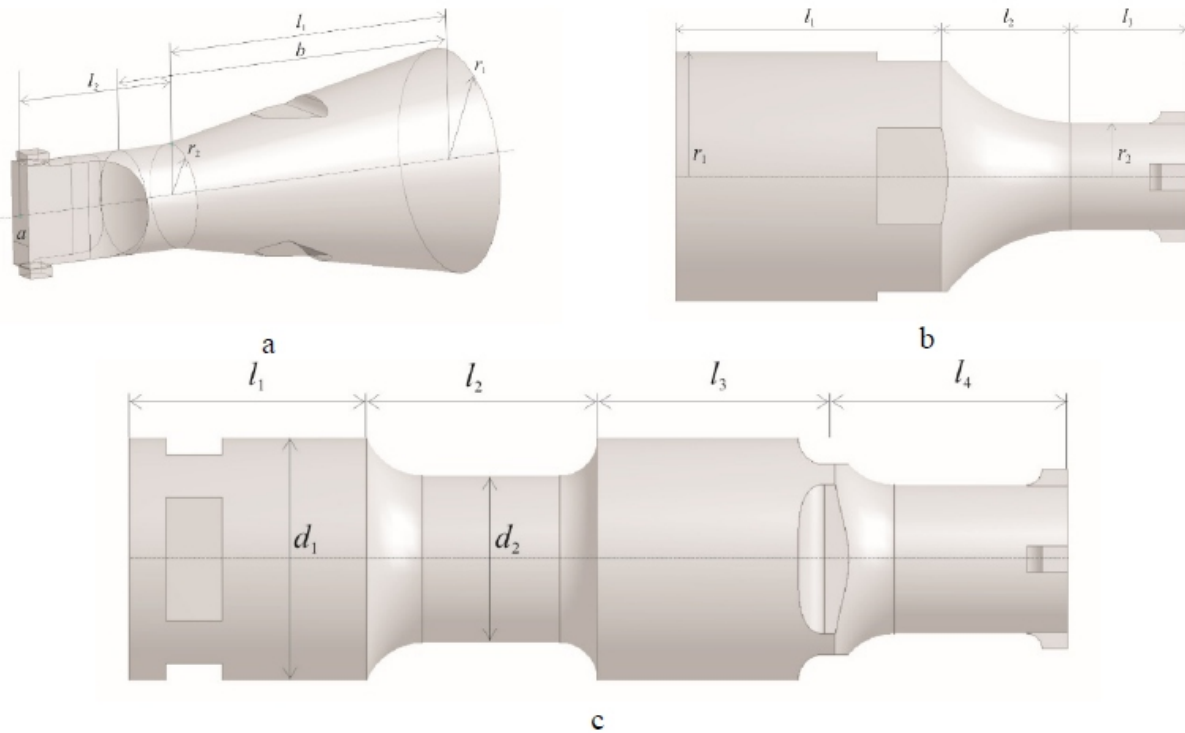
Schemes for design of horns for ultrasonic spot welding: (a) half-wave composite horn consisting of conical input and cylindrical output cut by radial surfaces (type 1); (b) half-wave stepped horn with radial transition (type 2); (c) one-wave stepped with radial transitions (type 3).
